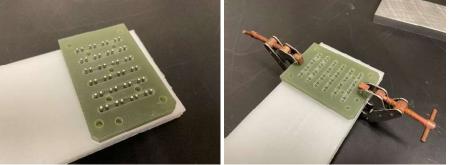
The inserted pins and the fully clamped G10 plate assembly.
